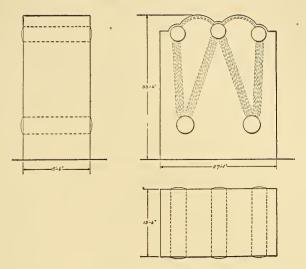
Type C2 Boiler arranged with A-shaped Furnace.
